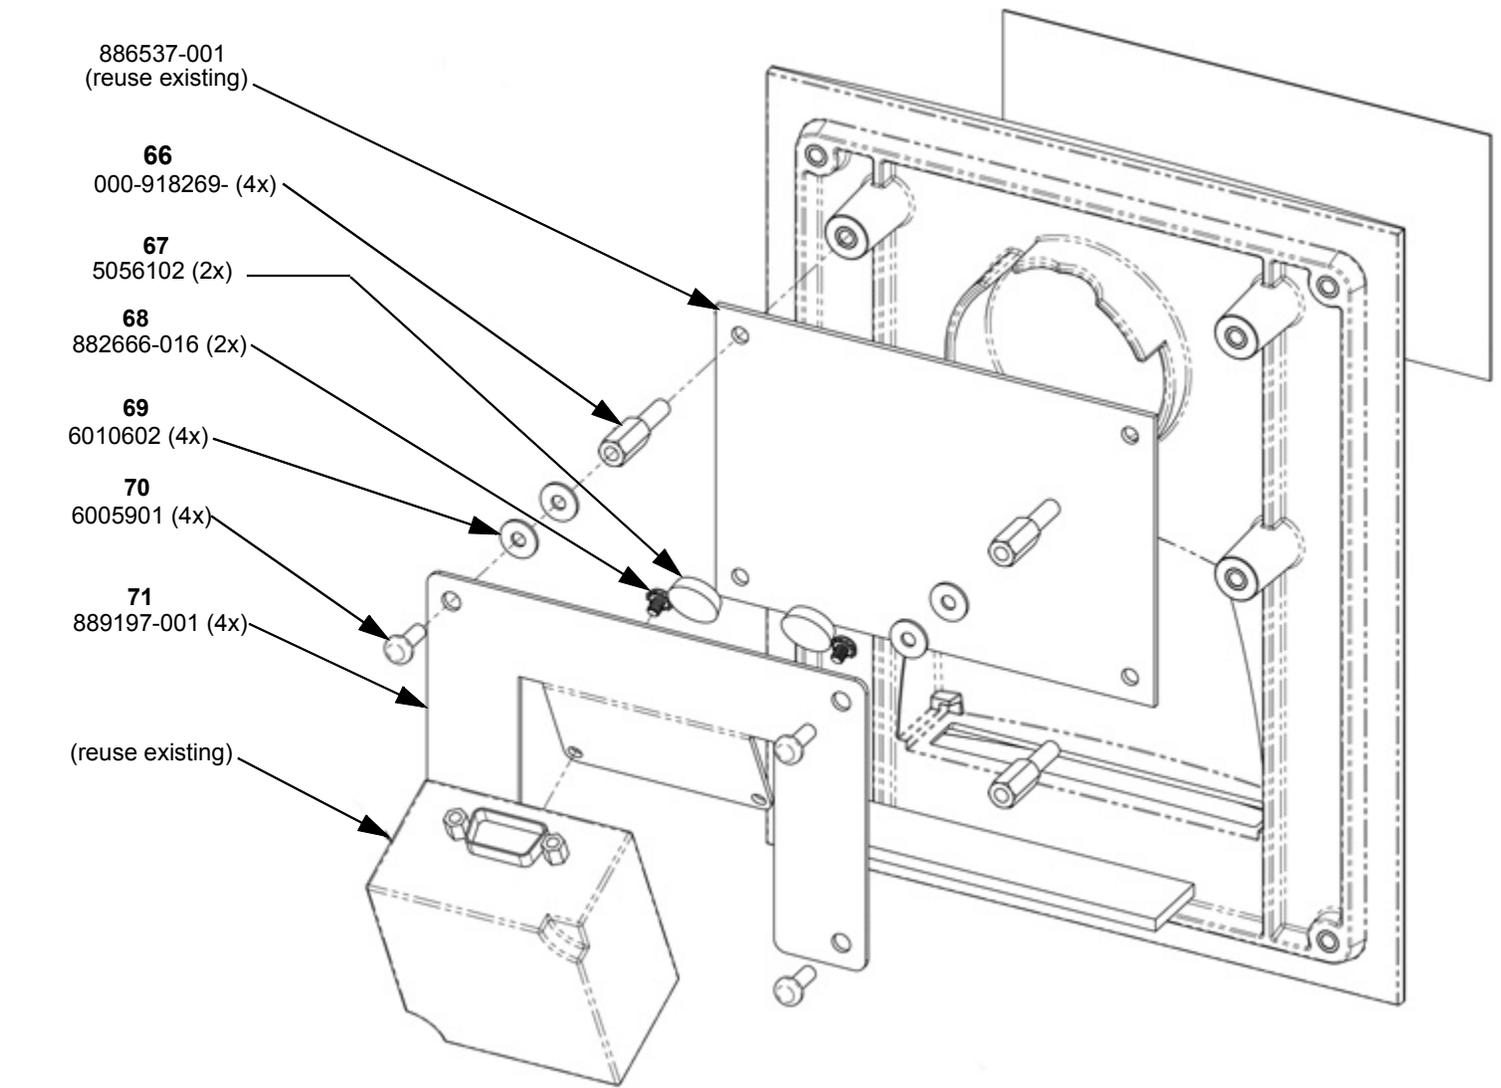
F OPTIONAL SCAN COMPONENTS AND ASSEMBLY (OPTION 1)
